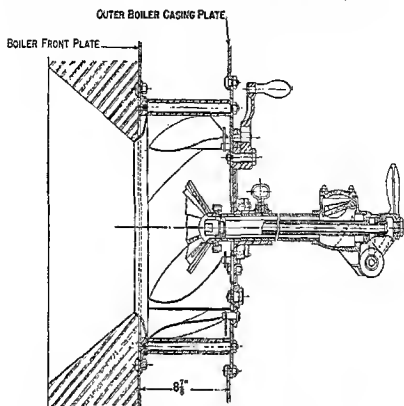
Assembly of Todd "Hex-Press" register with "Vee-Cee" atomizer.
